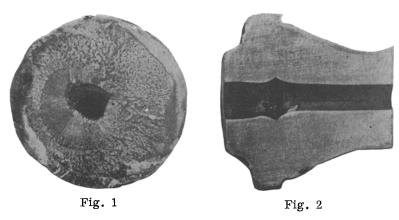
Fracture of drill rod manufactured by new technique. $2\times$. It can be seen that the fracture zone begins at the surface of the washing channel.
